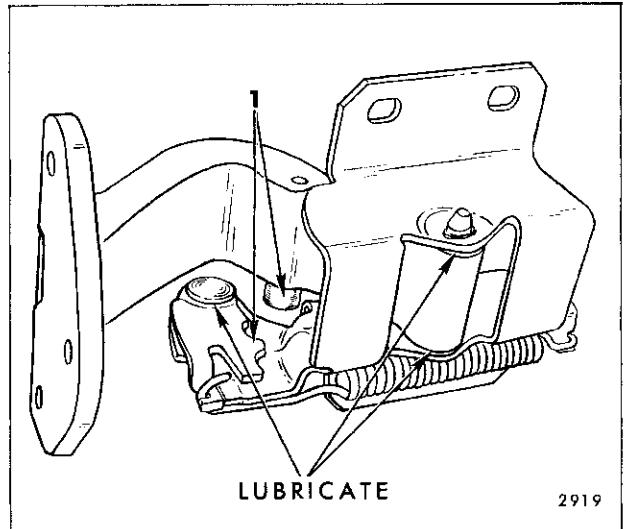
Front Door Hinge Assembly - "B" Body Styles
